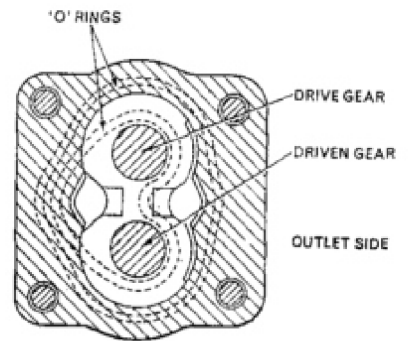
Drawing showing correct installation of gears and bearing blocks in pump body. View is from rear (flanged) end of pump body.
